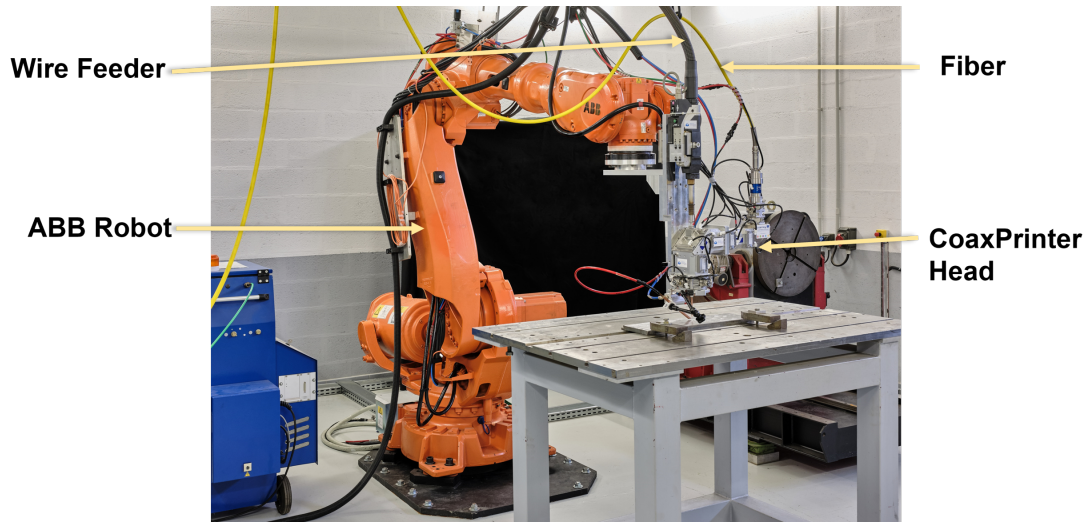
Experimental Setup of LWAM platform at Institut de Soudure.
